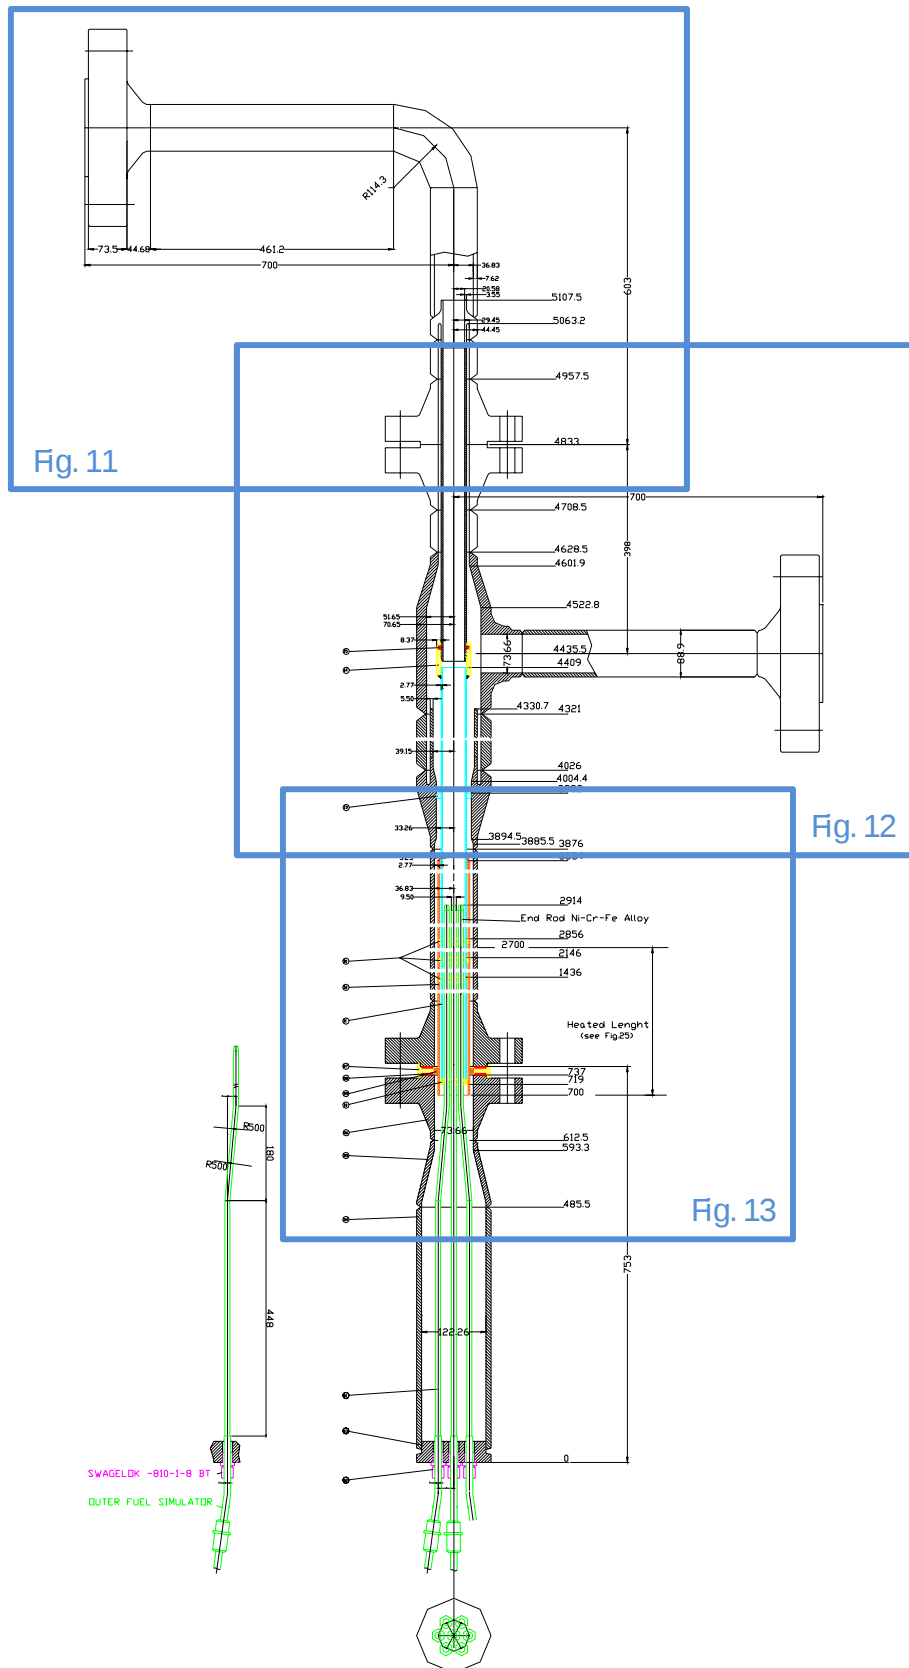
7-pin Test Section Arrangement and Rod Grids
